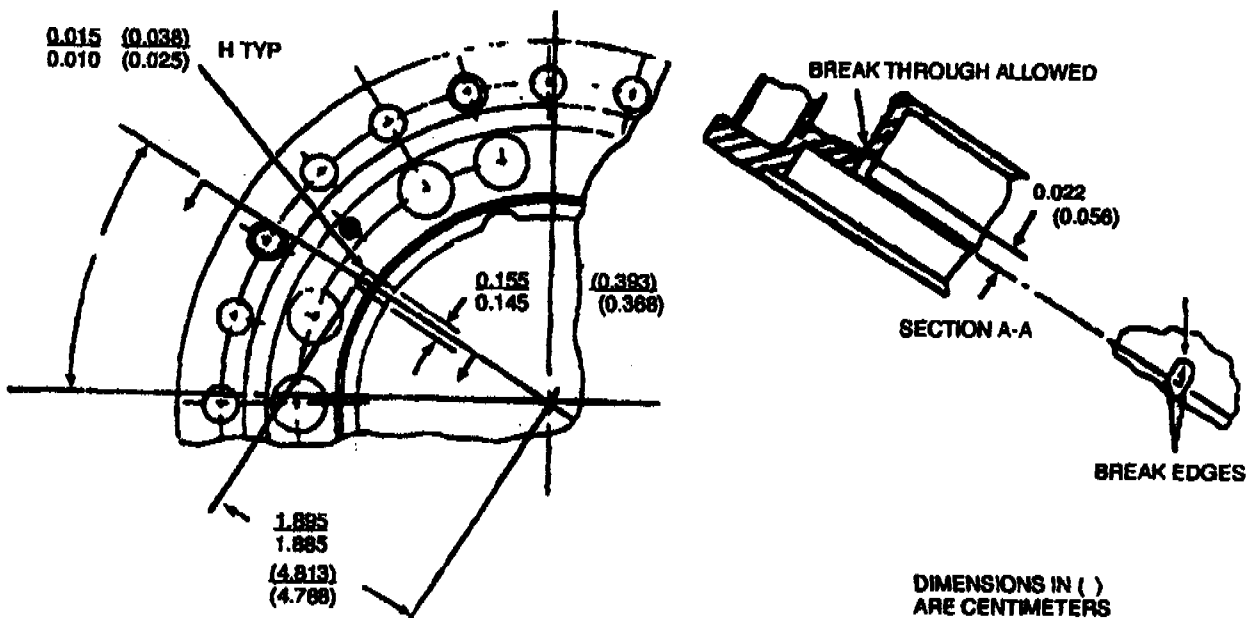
Rework of Numbers 3 and 4 Bearing Housing.
